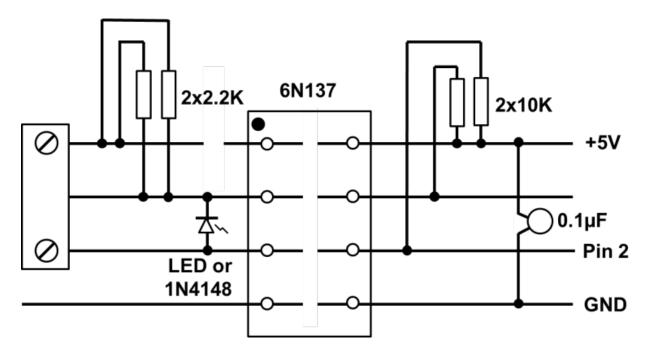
shows the circuit and layout superimposed on the Veroboard. The horizontal lines depict the copper tracks on the side you solder the components to; the components themselves go on the insulated side.
